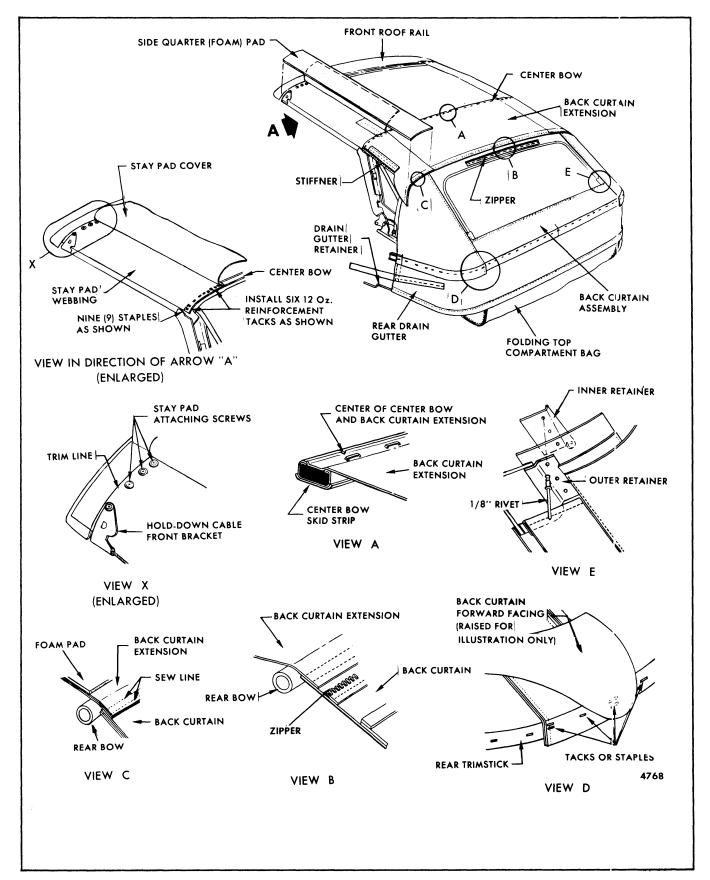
Back Curtain Assembly Attachment and Reference Marking
